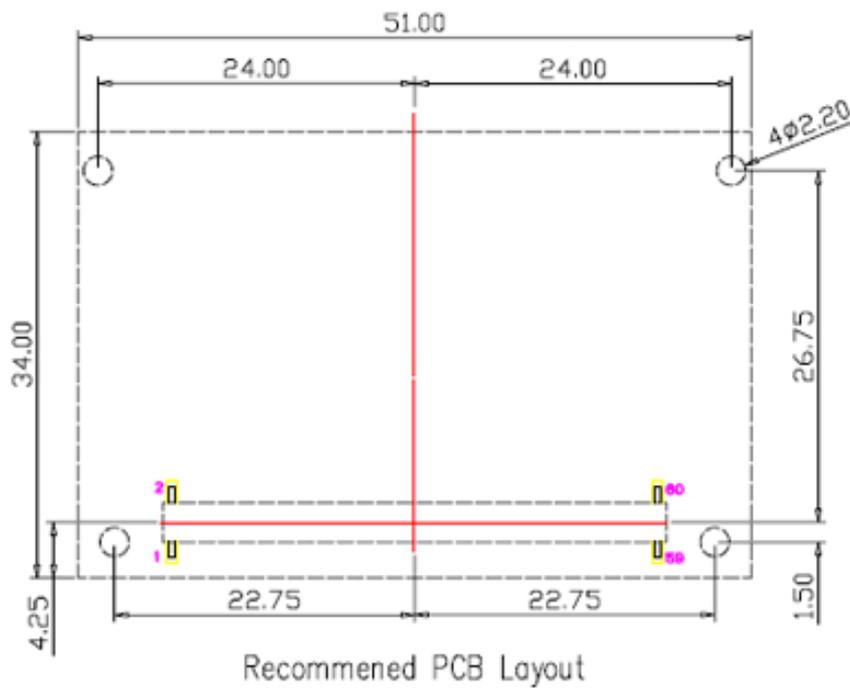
Mechanical dimensions of module PCB decal (Unit: mm)
